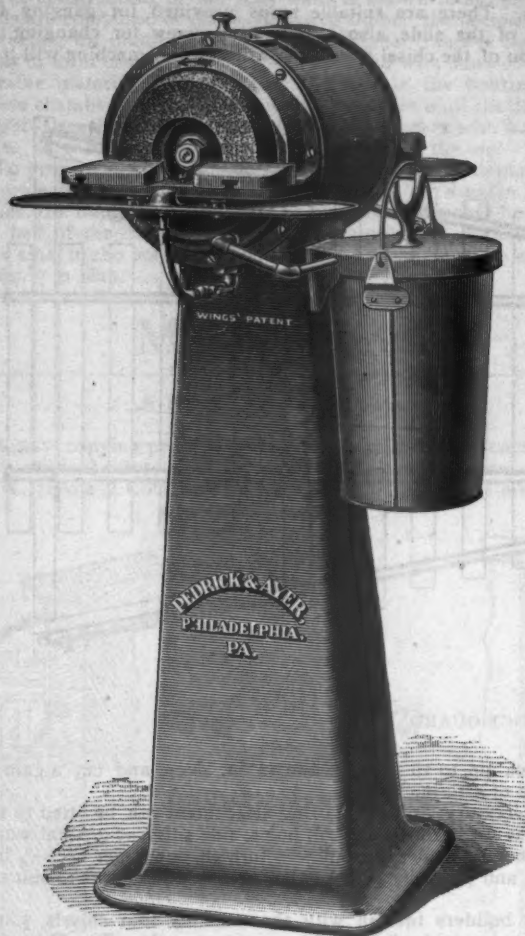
NO. 8 HORIZONTAL DOUBLE GRINDER.
